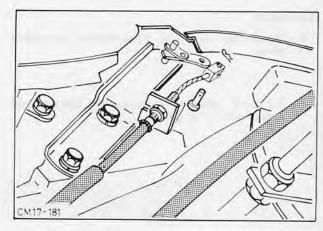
Disconnect downshift cable from carburettor linkage connecting lever
